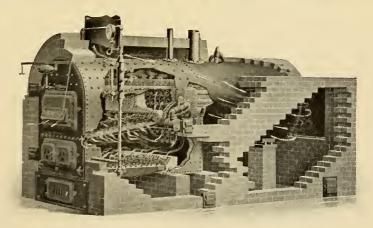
SECTIONAL VIEW, SMOKELESS FIREBOX BOILER.
